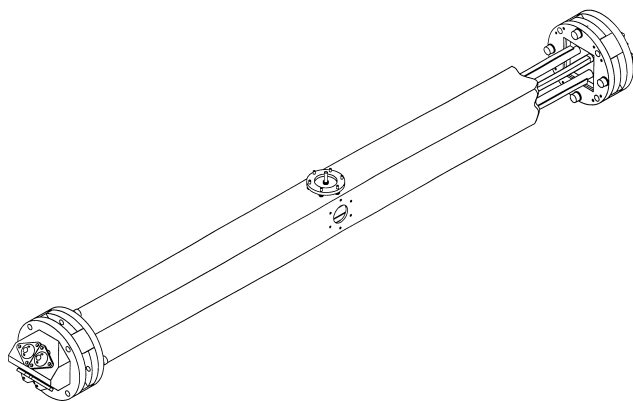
General view of the experimental laser. Part of the casing near the flange on the right side is removed to reveal the arrangement of discharge tubes.
